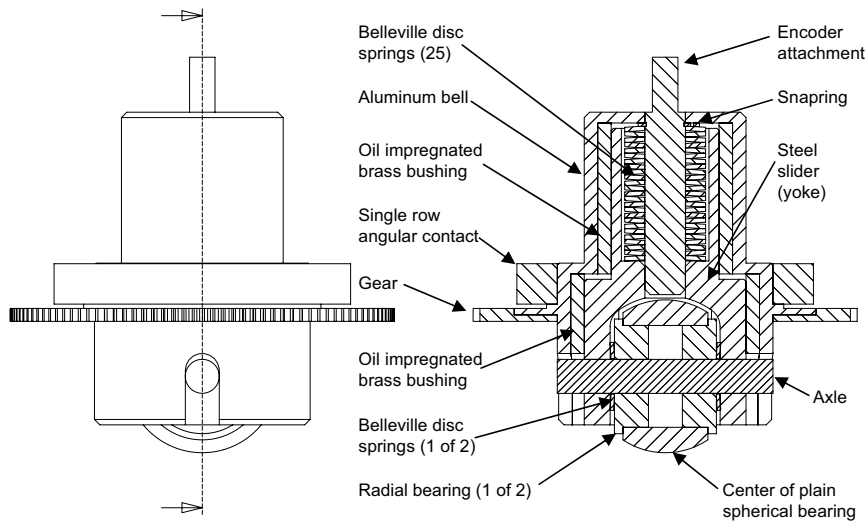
Steering bell features. The yoke supports the CVT wheel axle and is able to slide freely within the bell, guided by the brass bushings normal to the cylinder. If the distance between the linear guideway and cylinder changes over the stroke length, the Belleville springs absorb the change in position of the yoke while maintaining a preload. The wheel axle intersects the bell and causes the wheel to steer as the bell is driven by a gear pressed around it.
